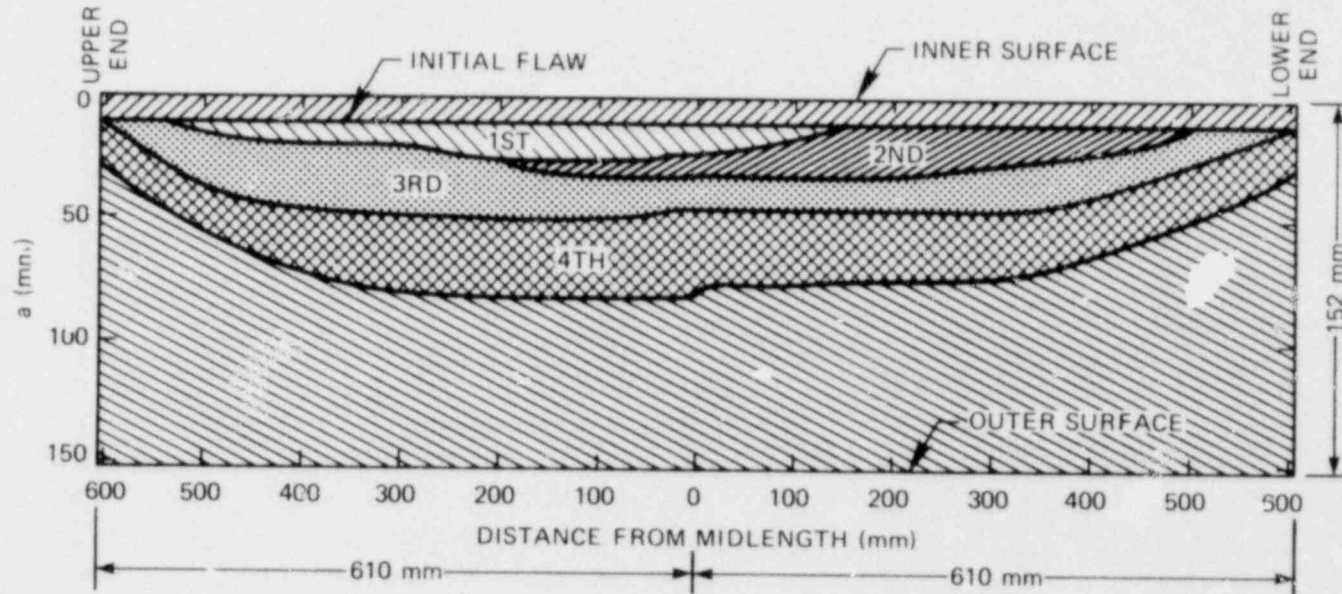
Schematic cross section of TSE-5A test-cylinder wall, showing four-step progression of long axial flaw as deduced from fracture surfaces.
